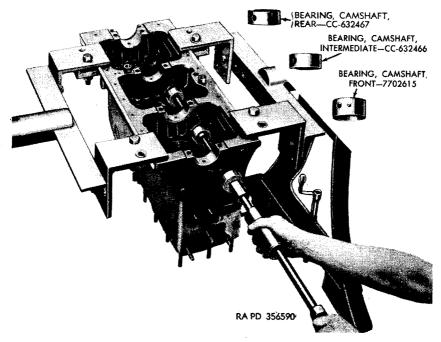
Installing camshaft bearings with remover and installer 41-R-2386.
